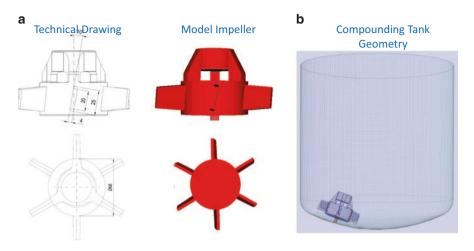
(a) Technical drawing and model of bottom-mounted agitator. (b) Simulated geometry of mixing tank equipped with bottom-mounted impeller
